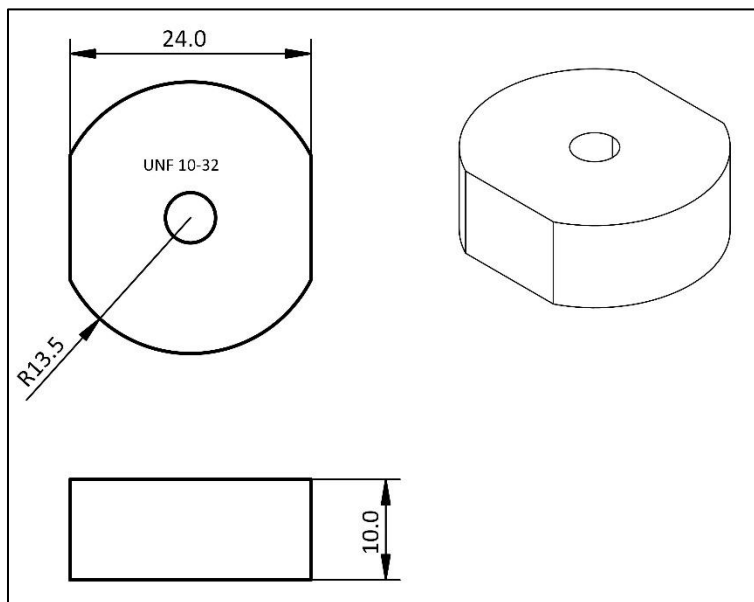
Drawing showing stainless steel adaptor dimensions. Drawing is not to scale.
